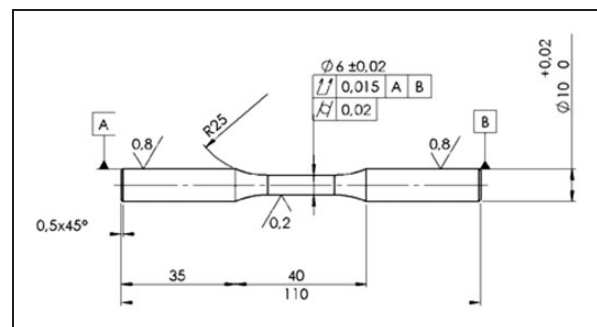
Specimen dimensions in accordance to ISO 1143 standard.
